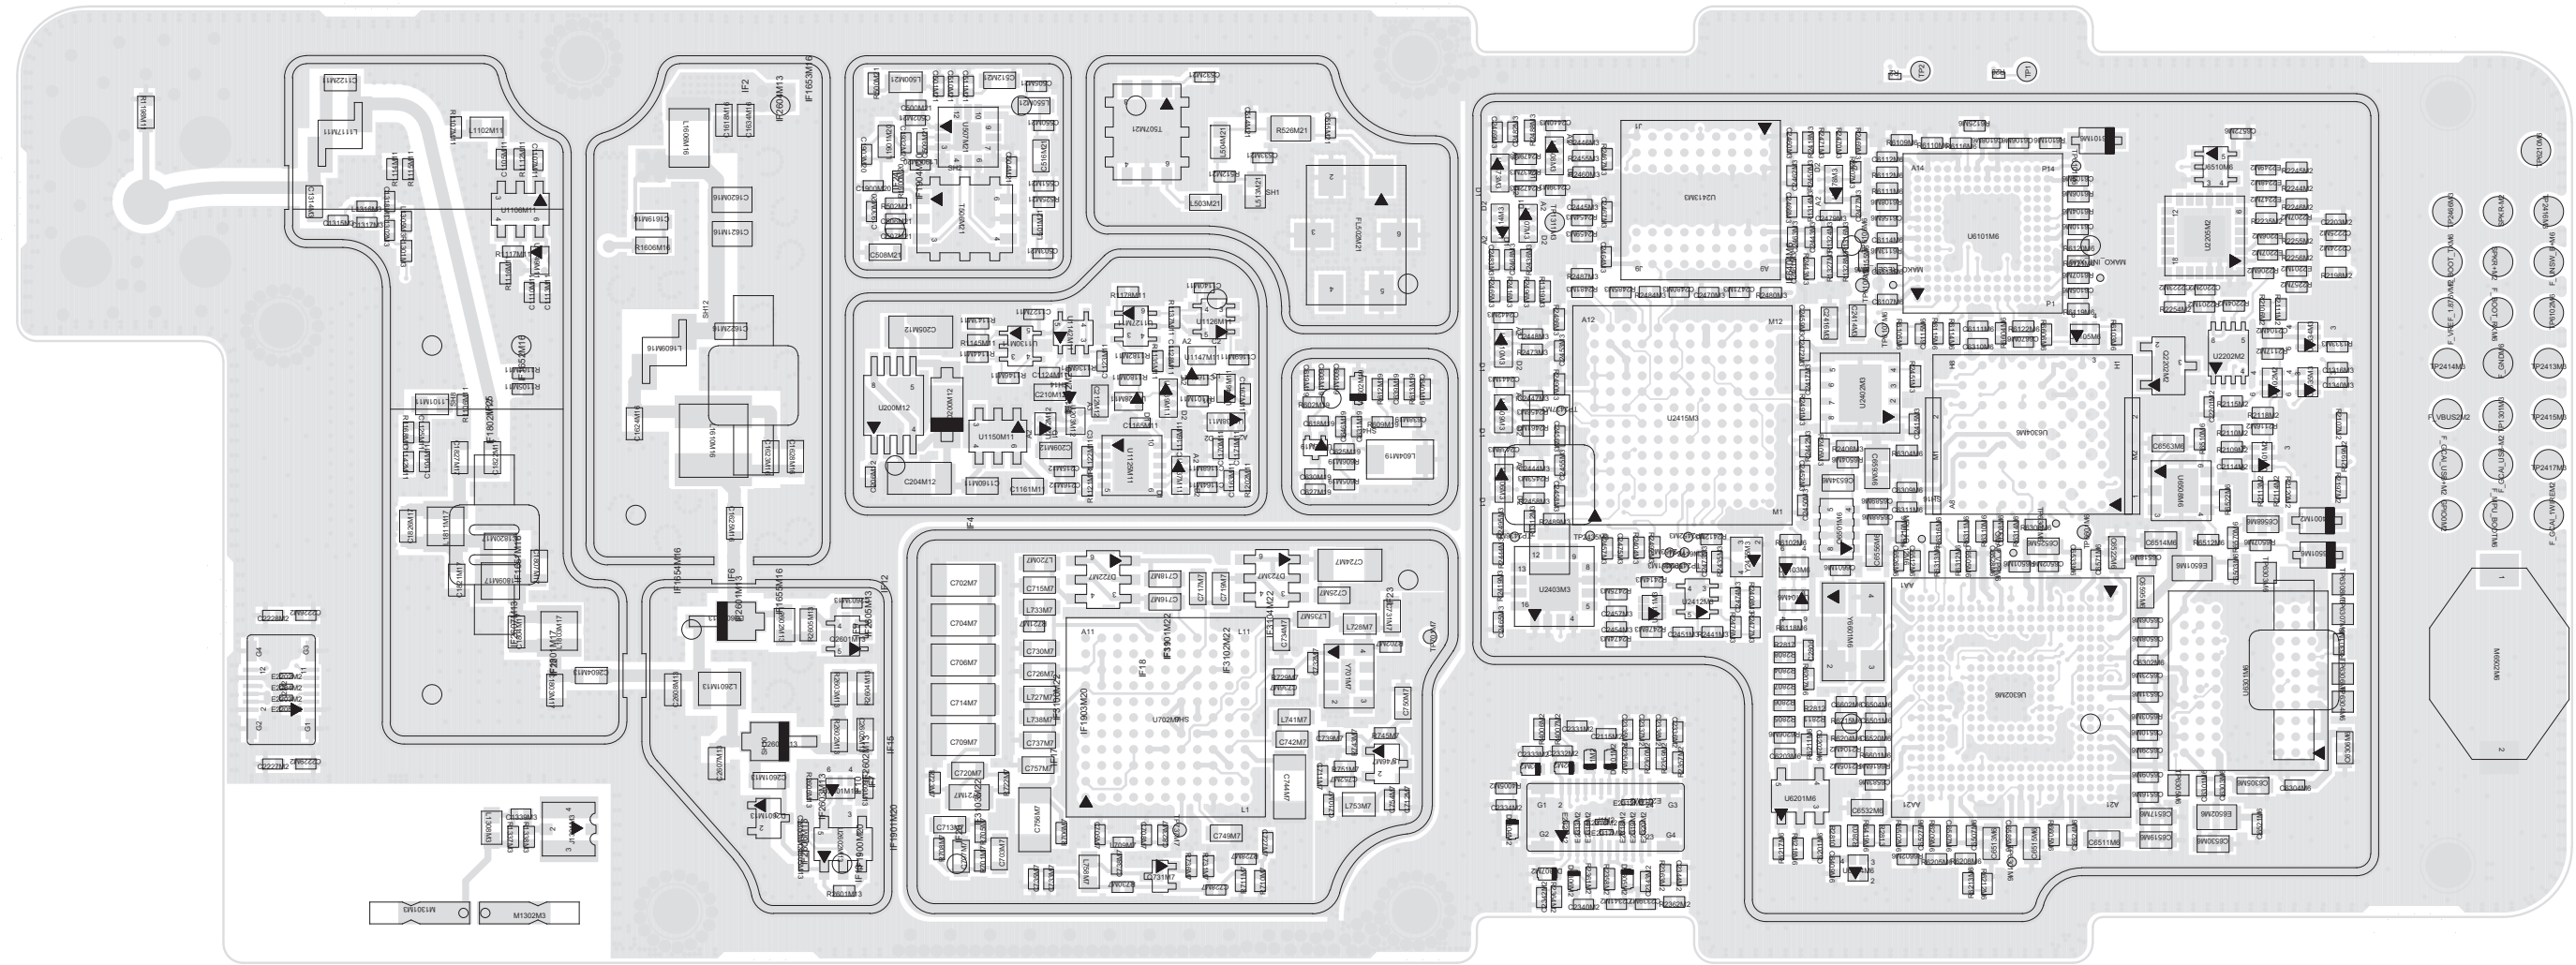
Transceiver (RF) Board Layout – Top Side
